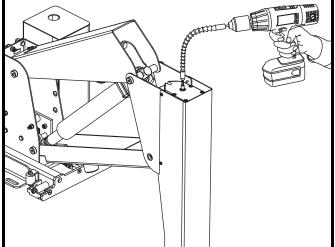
B. Raise Or Lower The Platform (Single Adjustment Opening) Backpacker MV ONLY
